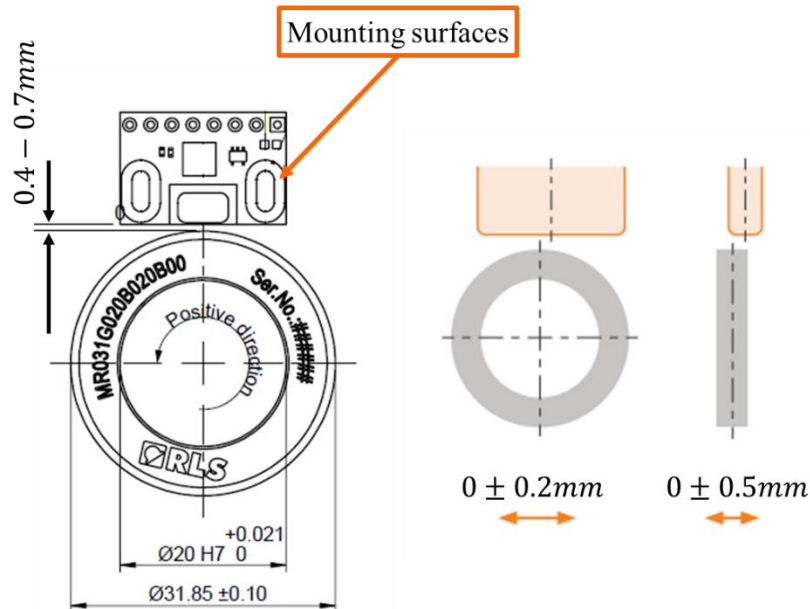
Mounting tolerances of the sensing system.
